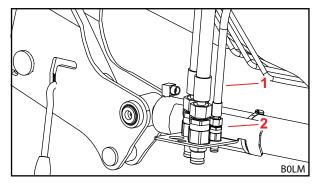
Hanging the hydraulic lines on the coupling mount (shown with plug-in couplings)
